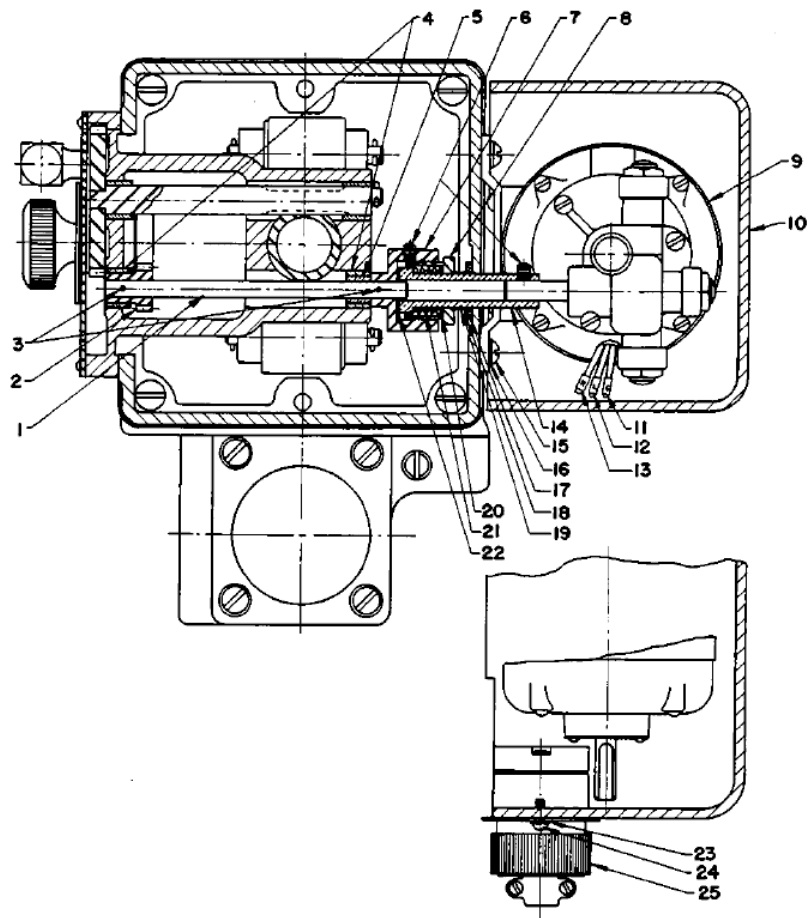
Motor and Drive Assembly, Rear Mounted Drive
